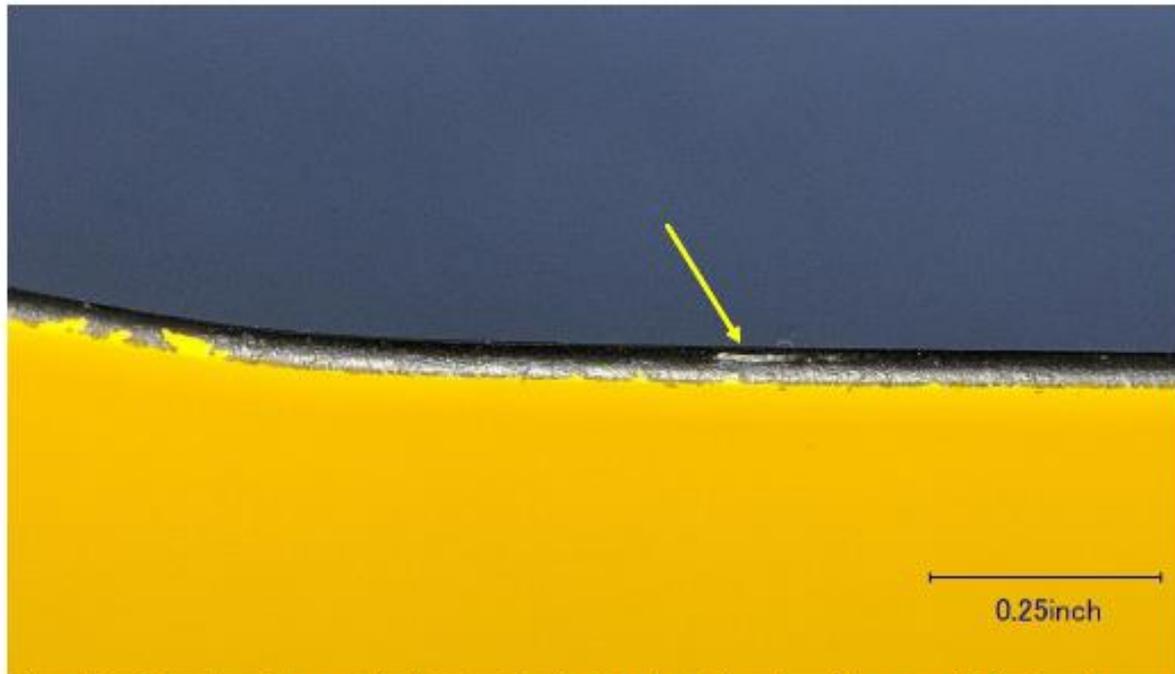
Closer view of the small paint protrusion found on the trailing edge of the exemplar blade section (arrow), as received.
